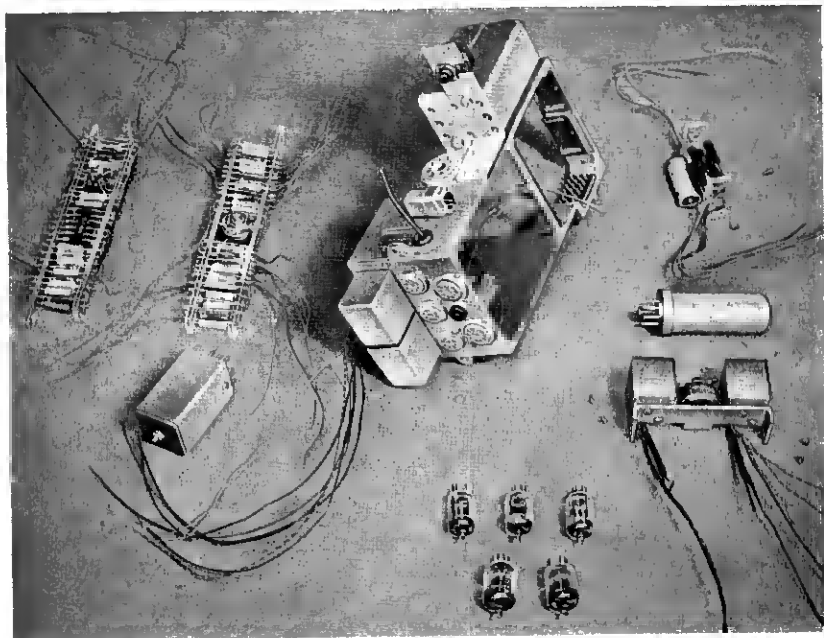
An exploded view of the expander and signaling subassembly ready for the final assembly operation. This shows the extent to which prewiring of small assemblies is used.
